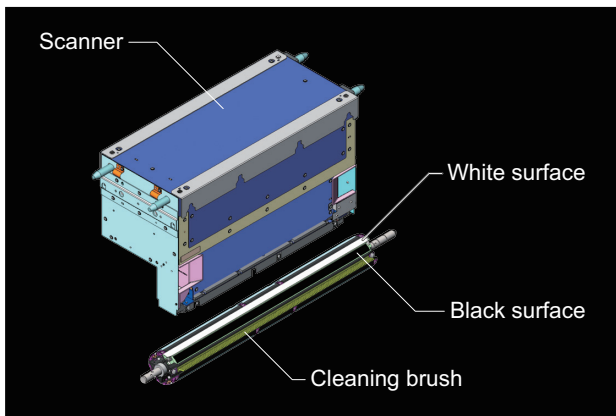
Part of the scanner uses black and white surfaces to detect paper dust which is then removed by a novel cleaning brush.
